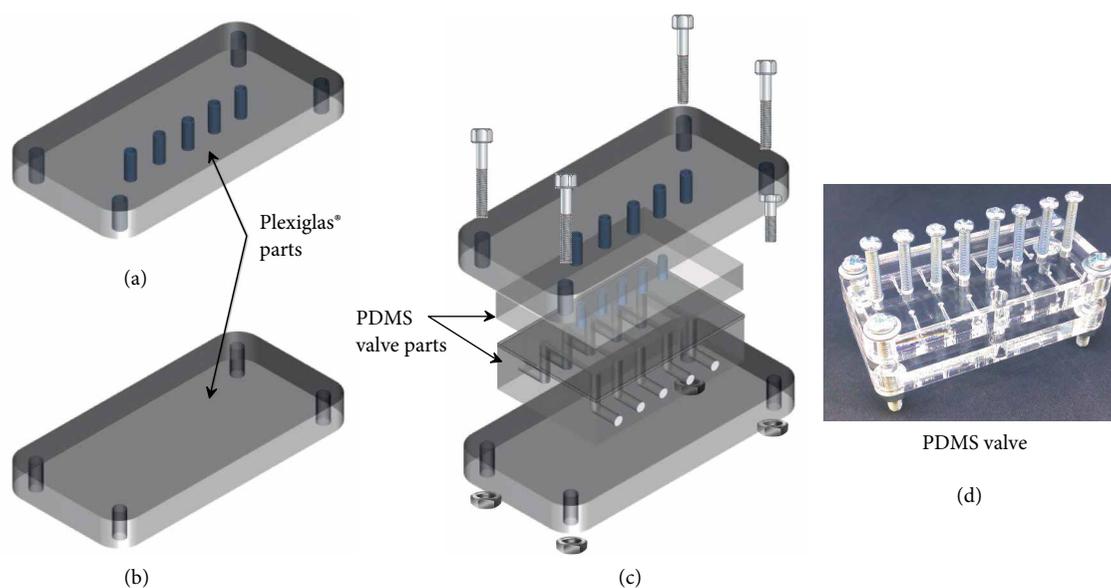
Description of the Plexiglas clamp design and the assemblage of the valve system. (a) and (b) Top and bottom support, respectively; (c) Assemblage of PDMS valve channels to Plexiglas clamps. (d) Final PDMS valve.
